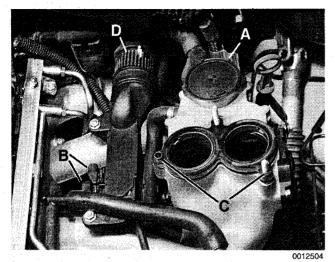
Crankcase vent valve (A), camshaft and crankshaft sensor harness connectors (B), locating bushings (C), main engine wiring harness connector (D). M44 engine shown.
